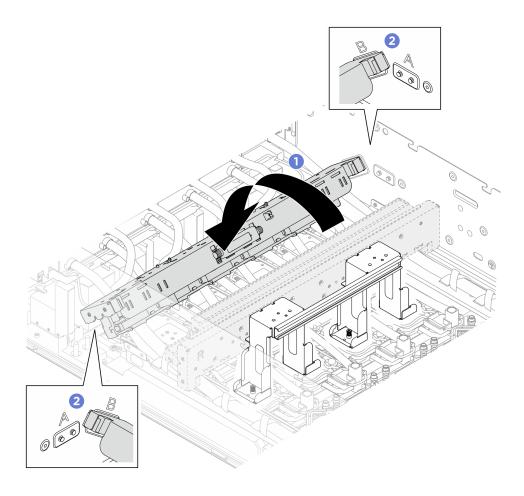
Repositioning the rear H100/H200 GPU cold plate module manifold
